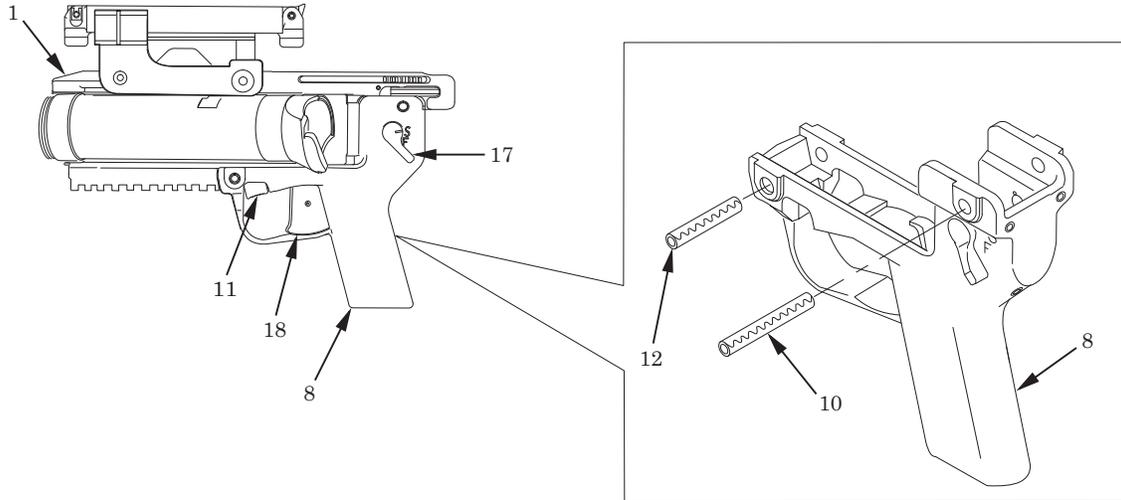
Installation of Pistol Grip Assembly to Receiver Assembly.
